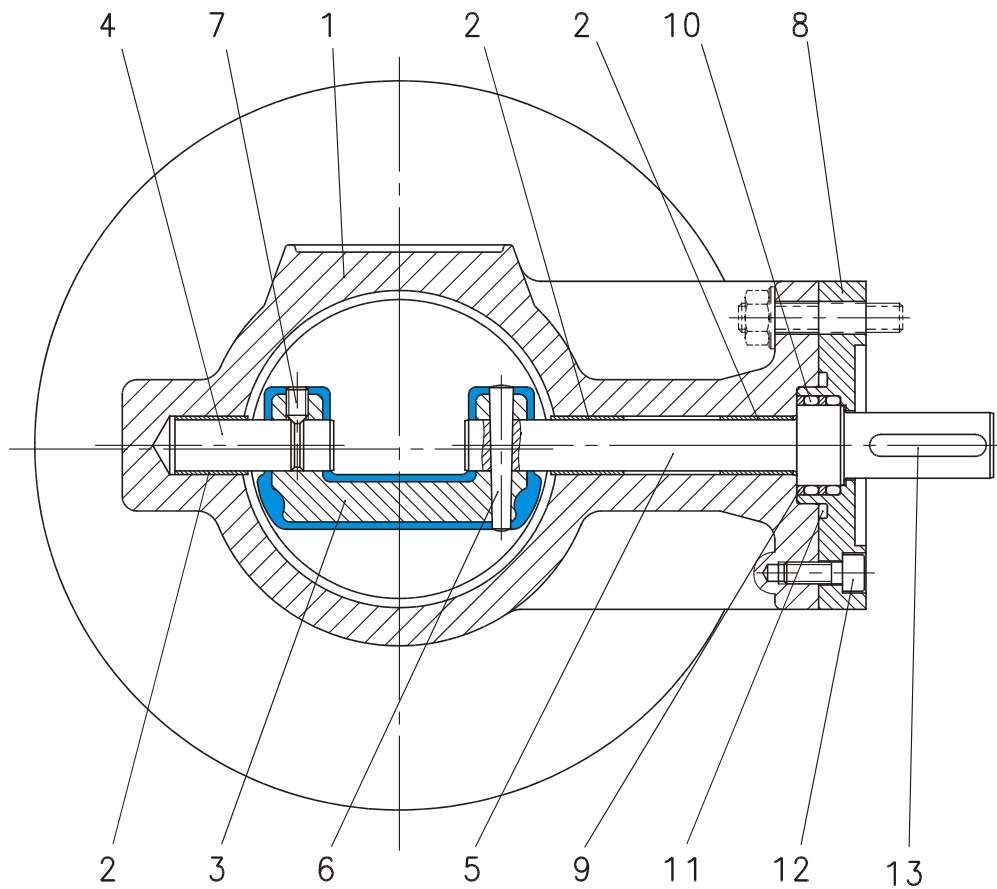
Sectional drawing of ROCO Butterfly Valve DN 80-125
